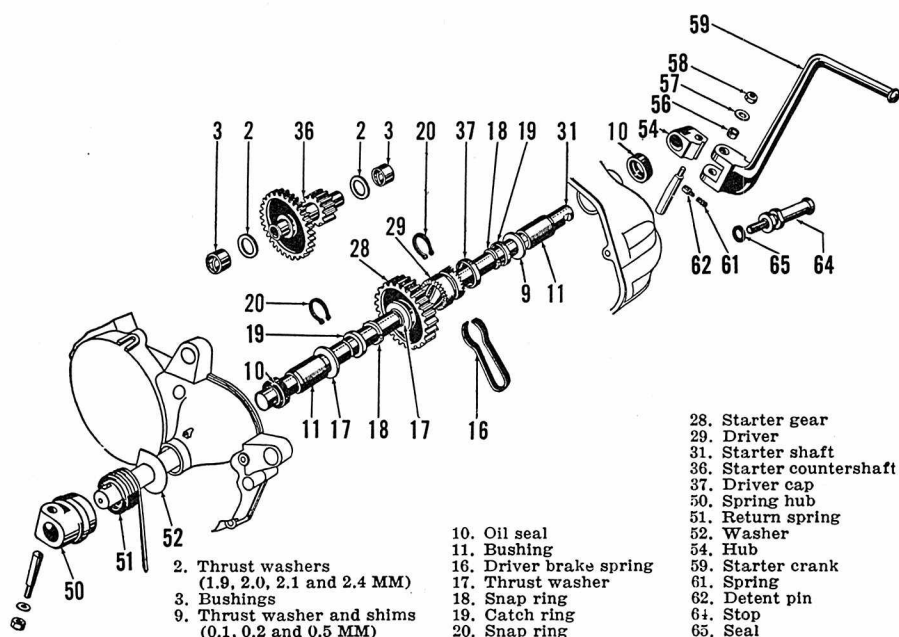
View of starter assembly typical of all models except Mo-Ped.
